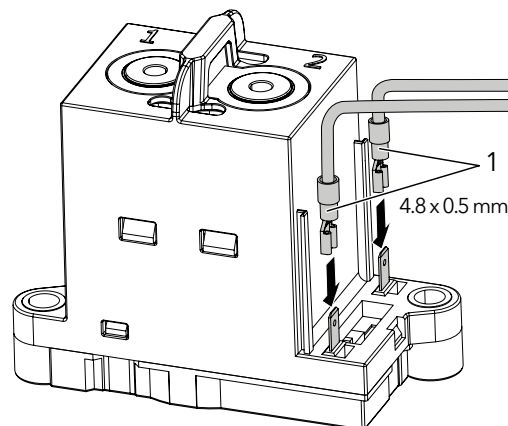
C303-XXX-G0F-...: Example with flat tab connector:
